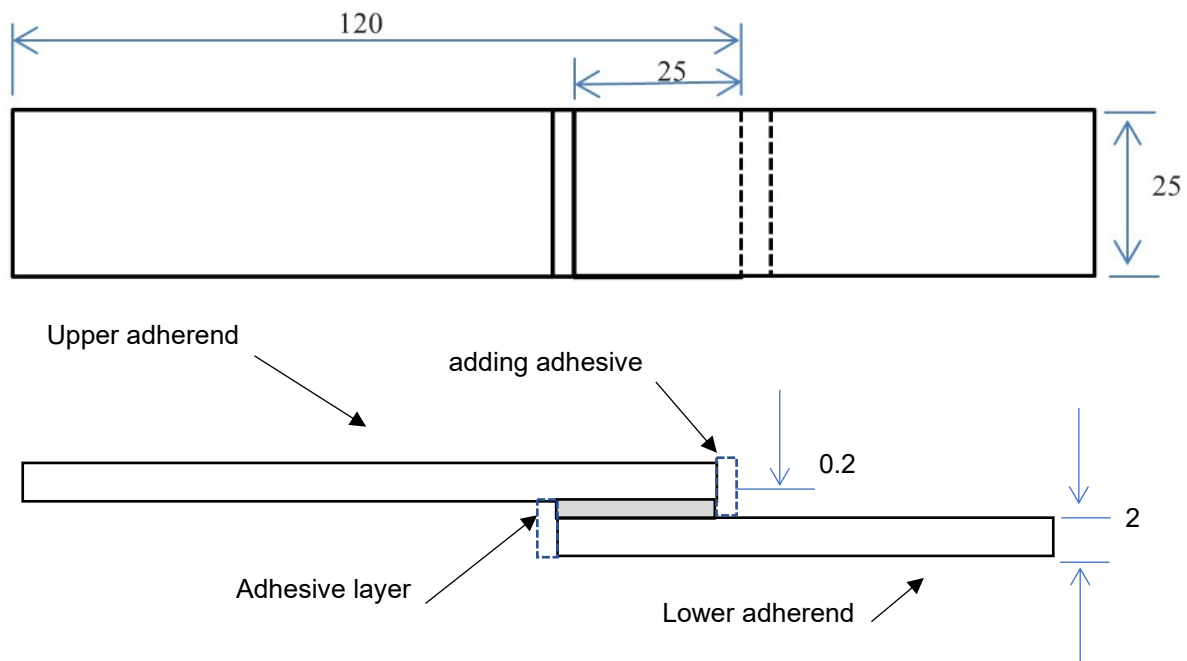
Geometry of the adhesively bonded cantilever lap joint (all dimensions in mm)
